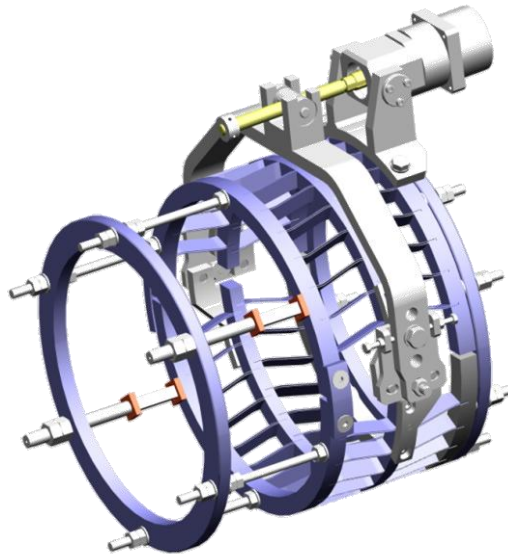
prototype revision of a lighter Blade Tuner
